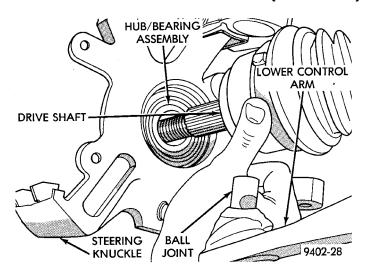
Driveshaft Installation Into Hub And Steering Knuckle
